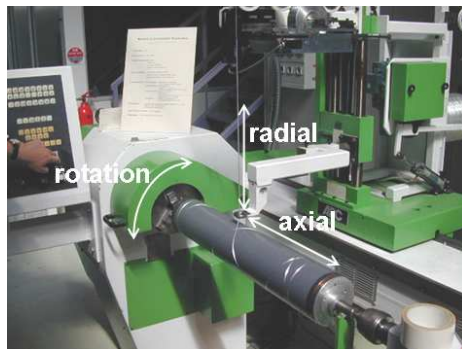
Filament winding machine (LGMT PRO²COM) and its displacements.
